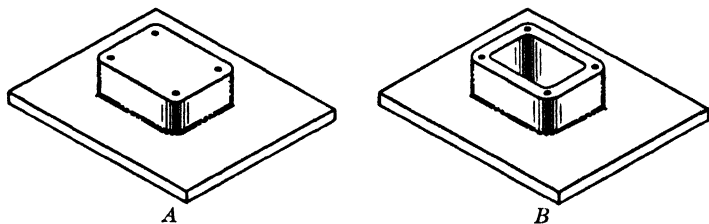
A. Old design with hot spot. B. New design with hot spot eliminated.
